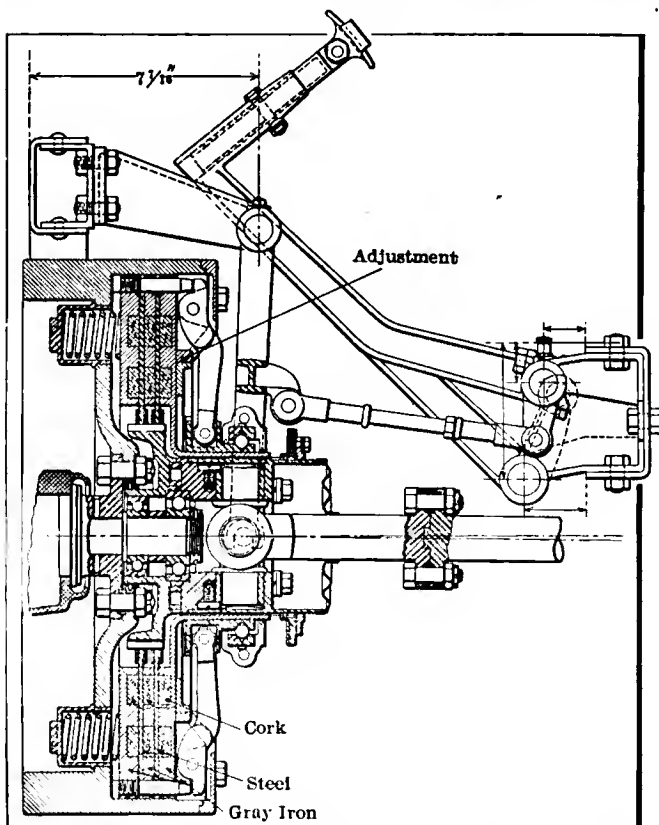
Sectional view of flywheel and clutch, illustrating multiple disc clutch, controlling mechanism and details
